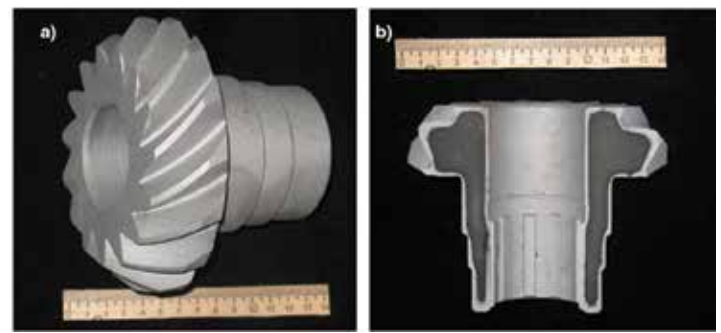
TSH Technology uninterrupted induction hardened pattern is obtained on a spiral bevel gear. [Courtesy of ERS Engineering Corp.]
